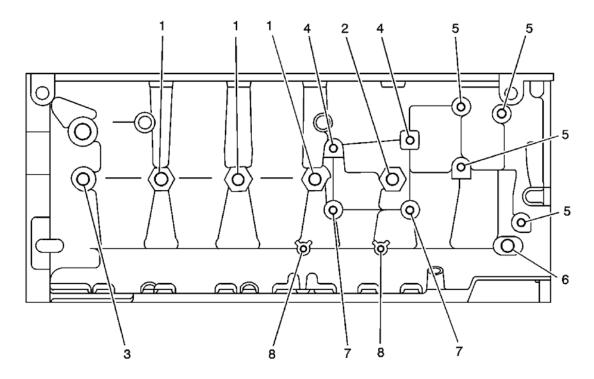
Engine Block Thread Repair - Right Side View Courtesy of GENERAL MOTORS CORP.
